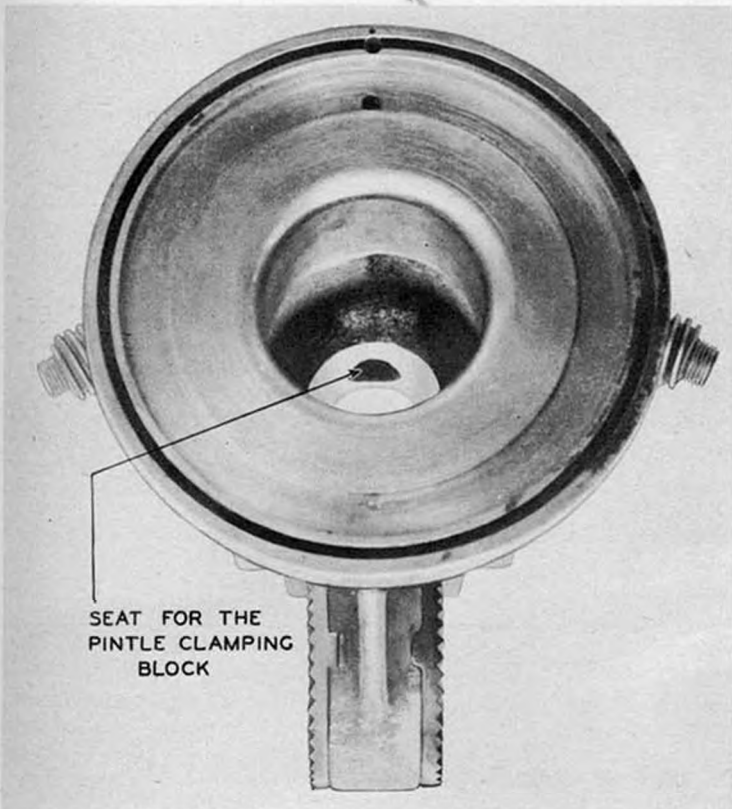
Inside of pintle socket assembly with cradle pintle clamping screw assembly and pintle clamping.
